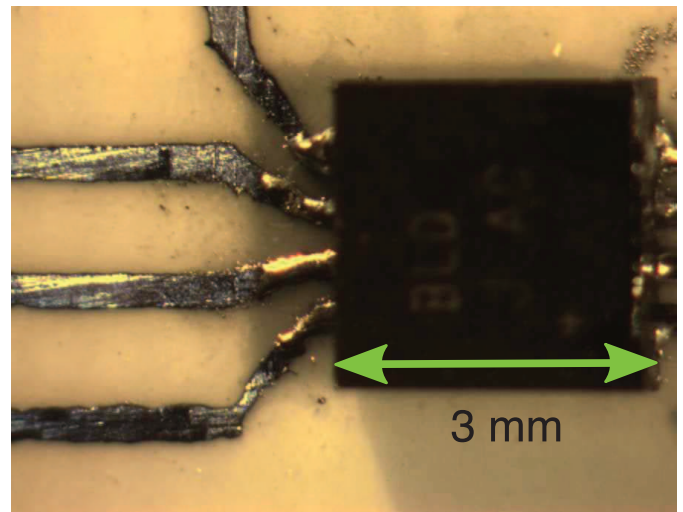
Circuit traces for a TDFN8 IC package fabricated with inkjet printing masking.
